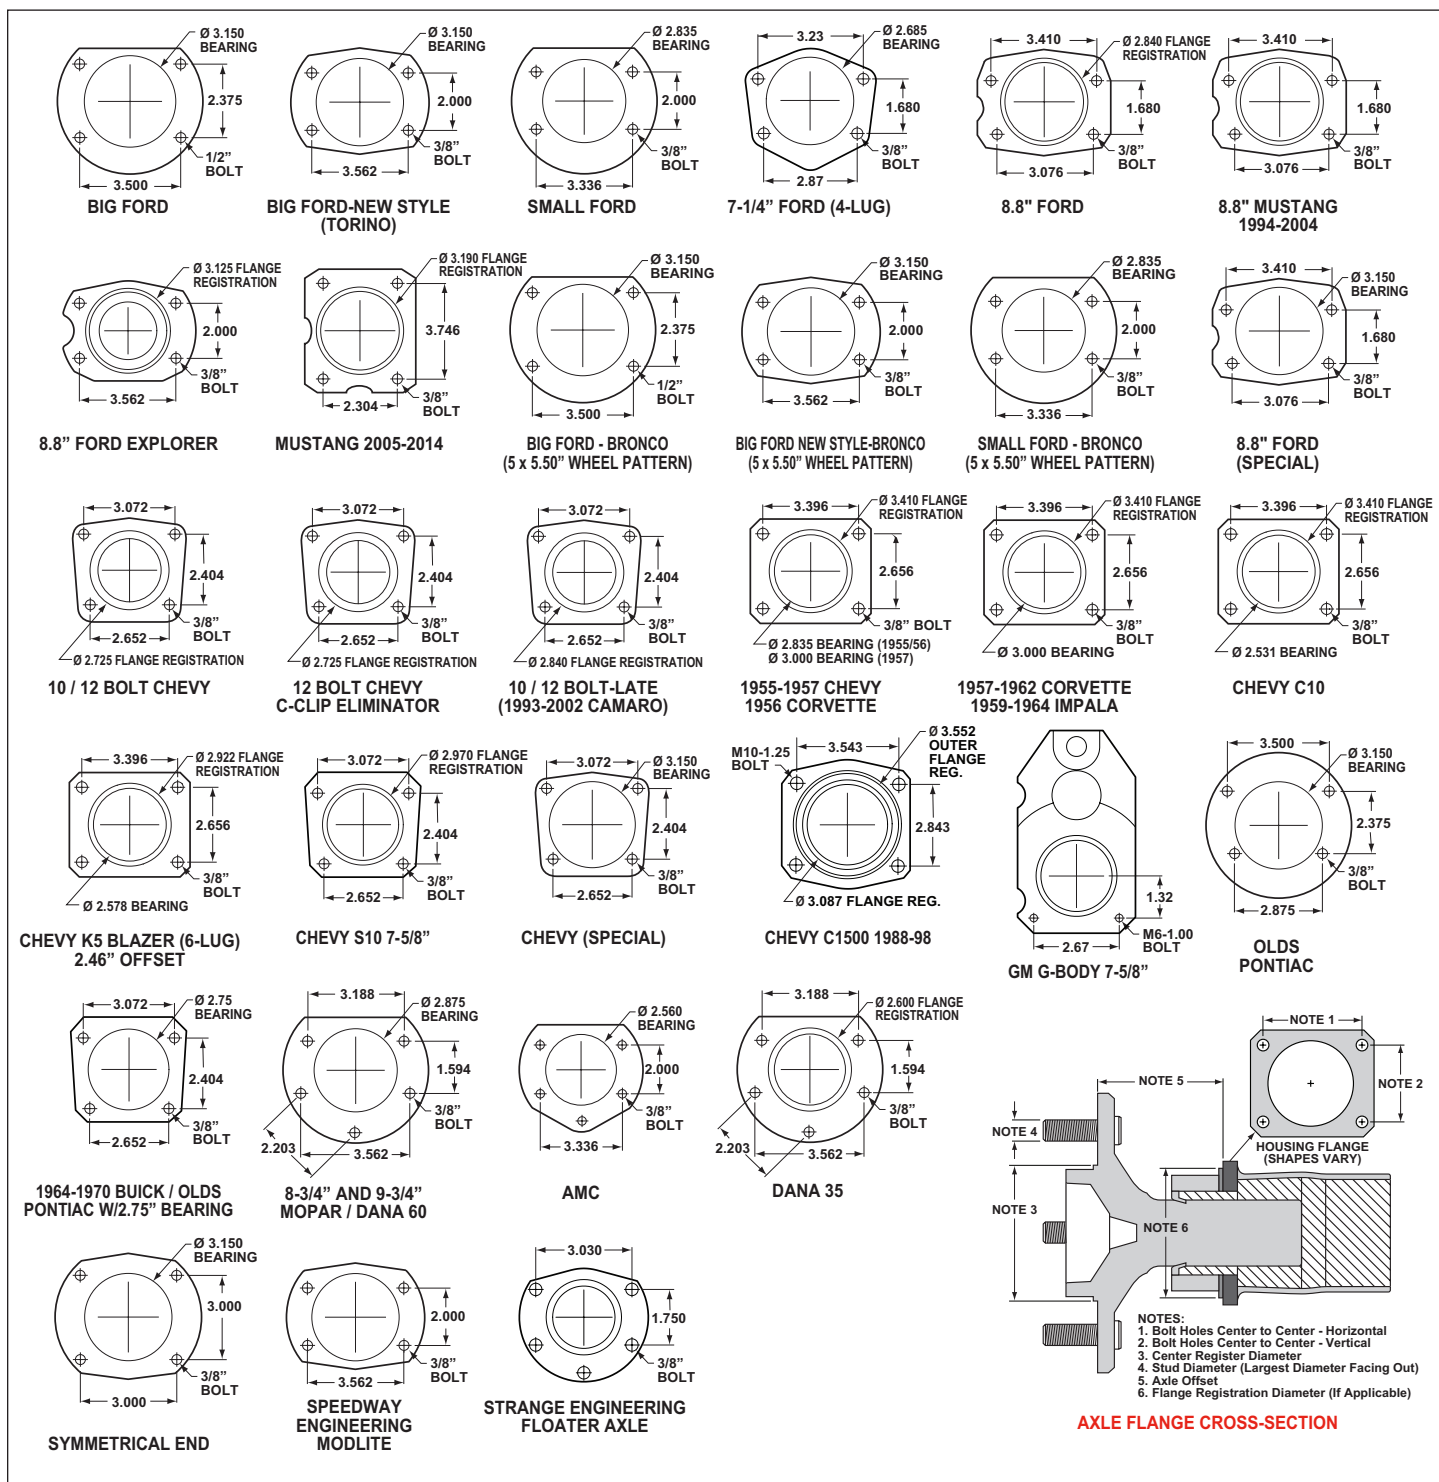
Rear Housing Flange Chart and Axle Flange / Offset Cross-Section
